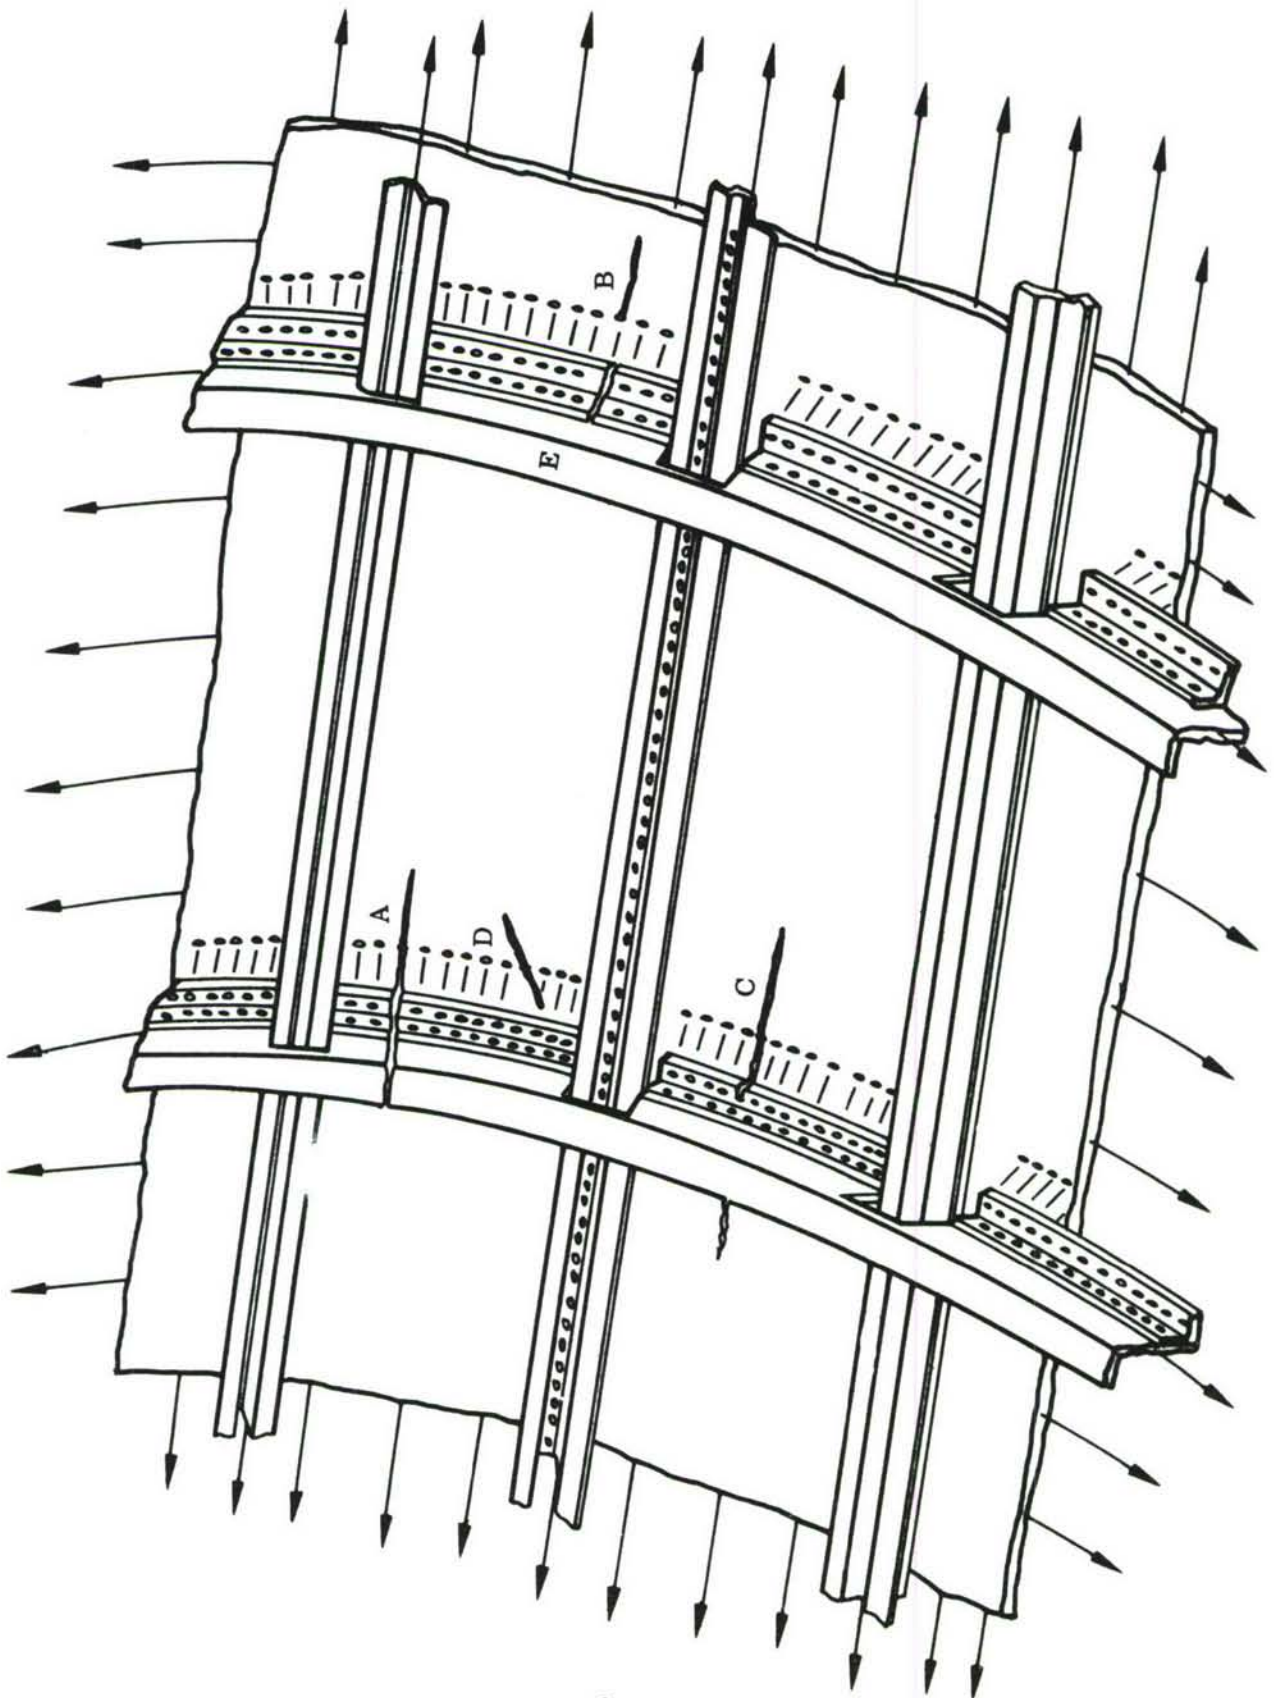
TYPICAL CRACK SITUATIONS IN PRESSURIZED FUSELAGE SHELL
